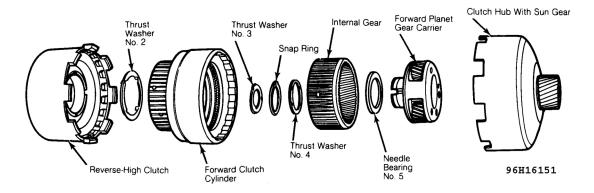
Exploded View of C-3 Automatic Transmission Assembly Courtesy of FORD MOTOR CO.
